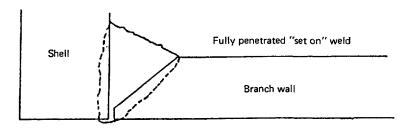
Fully penetrated "set on " weld.
